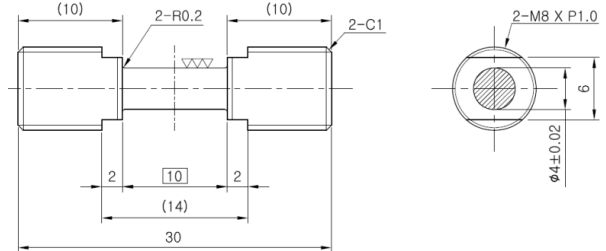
Shape and dimensions of specimen used<sup>(13)</sup>
